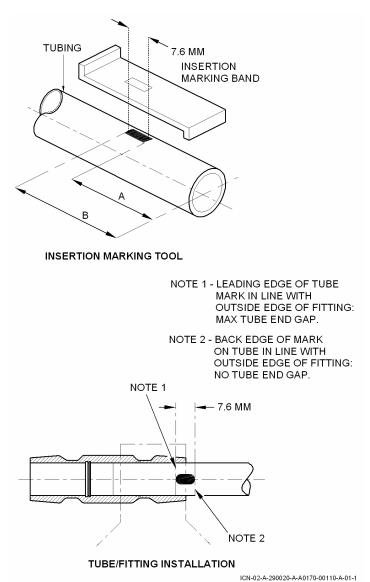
Permaswage Fitting - Installation (sheet 2/4)
